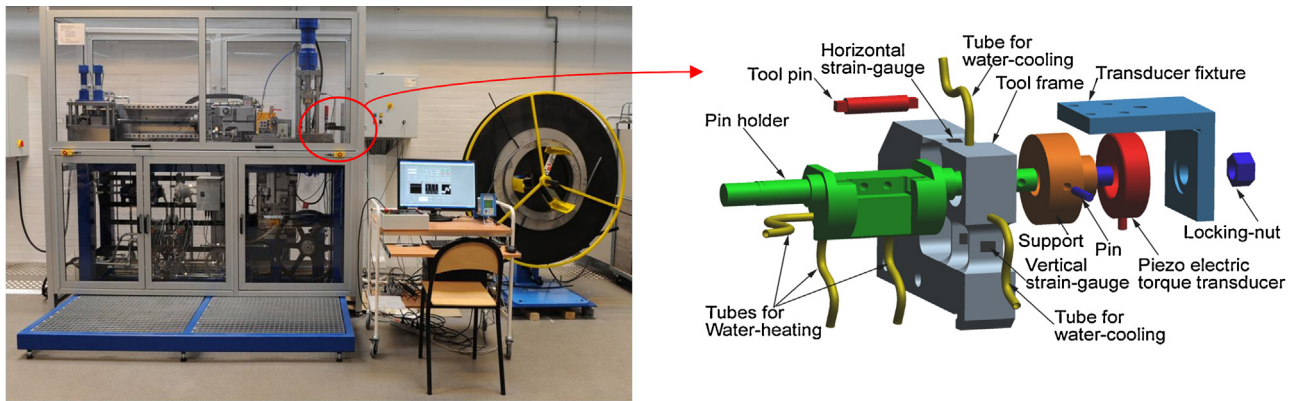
Sheet-tribo-tester used for BUT tests (left) [19], highlighting the tool pin holder with embedded transducer (exploded view, right) [20].
